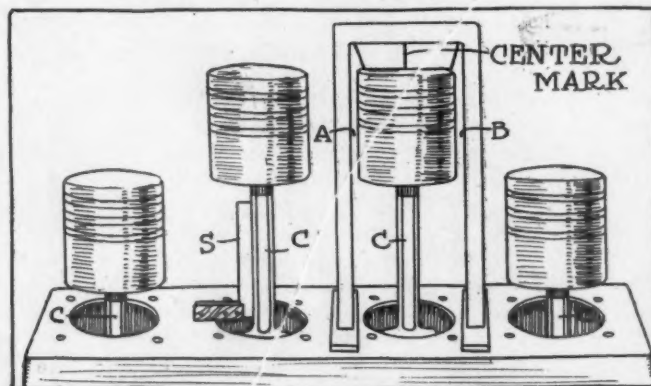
ONE METHOD OF LINING UP PISTONS AND CONNECTING RODS OF BLOCK MOTOR
